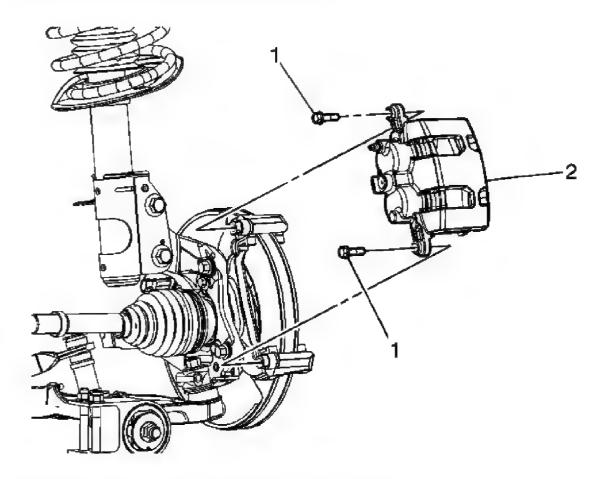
Replacing Front Brake Caliper - (JL9) Courtesy of GENERAL MOTORS CORP.
